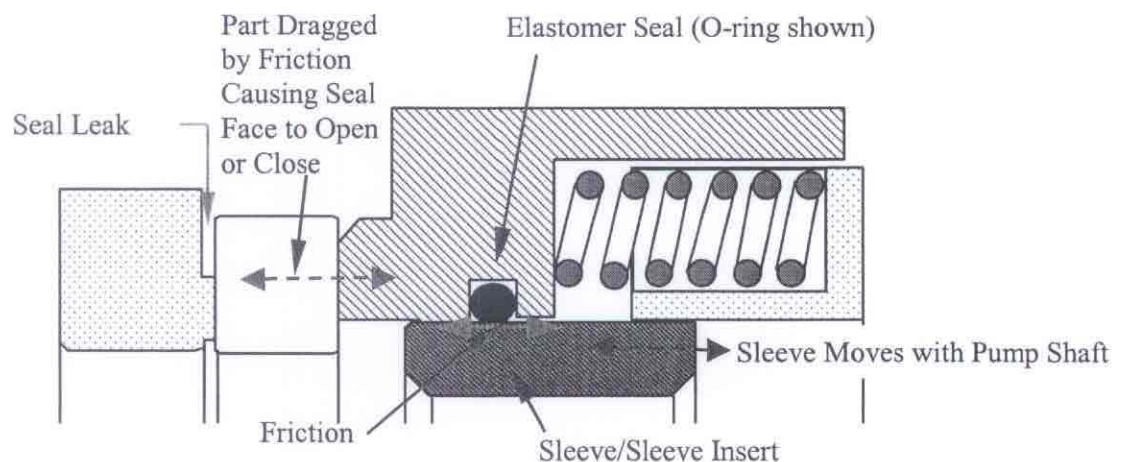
Friction Between Elastomer Seal and Sleeve of a Typical Rotary Seal
